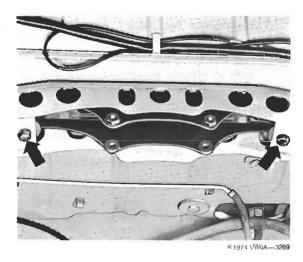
Bolts that hold transmission carrier to frame crossmember.
